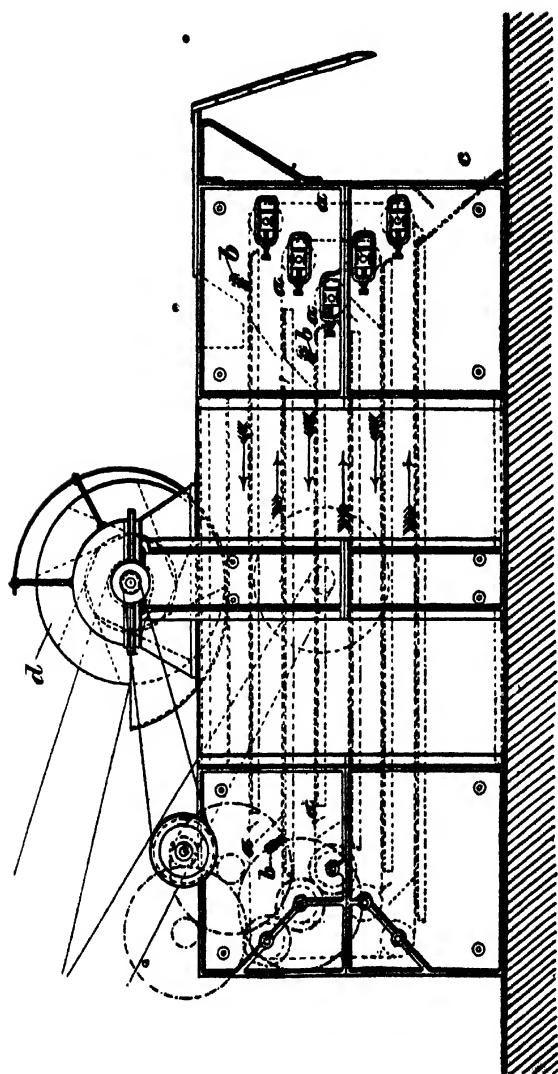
Automatic Up-draught Tea Drying Machine, with Reversible Oppositely Moving Trays Mounted on Separate Chain Wheels (longitudinal section).
